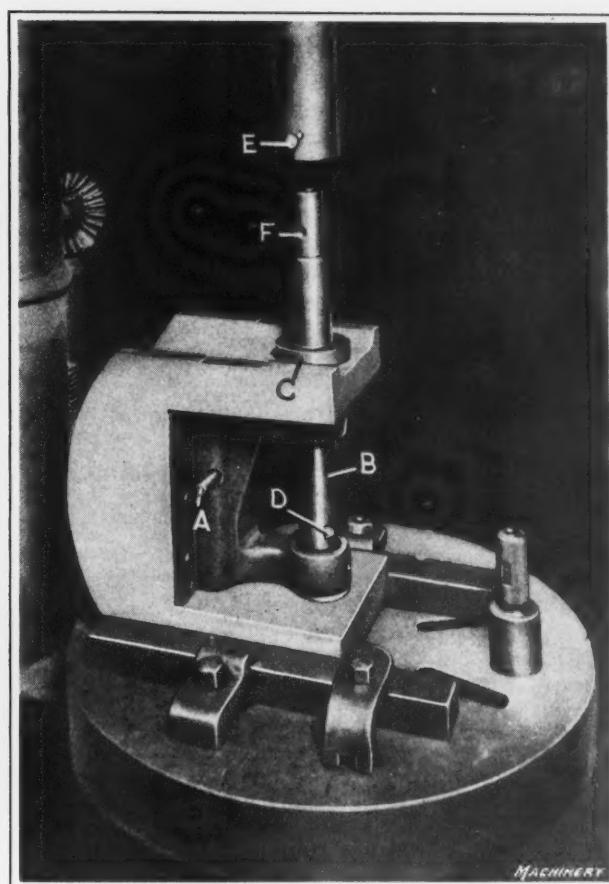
Fixture used in boring the Bearing Holes in the Headstock Casting
